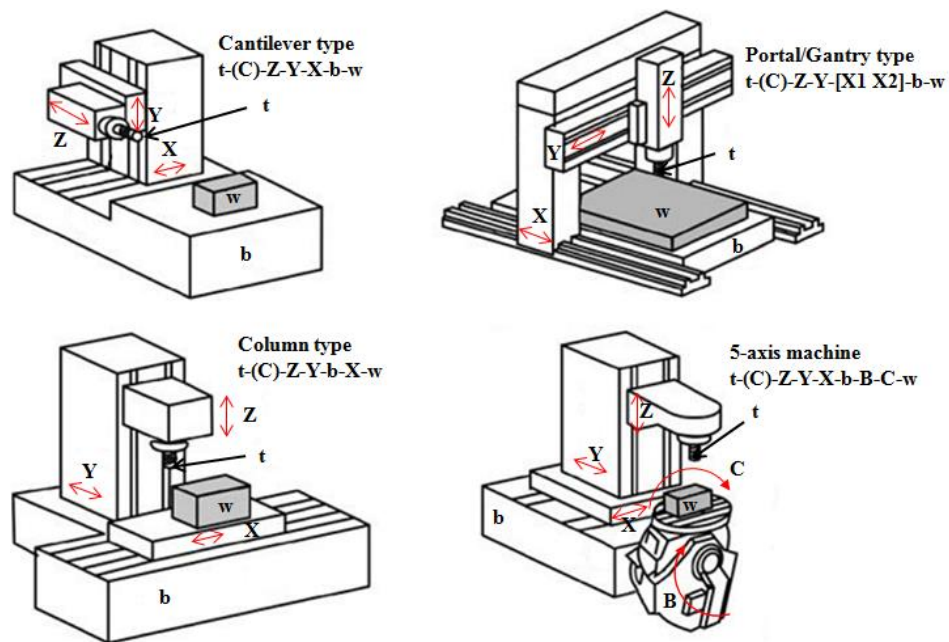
Serial kinematic machines abstracted to kinematic chain (t: tool, b: bed, w: work piece) [56].
